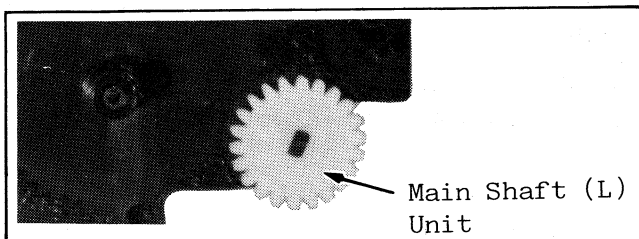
Adjustment of Cassette Up Gears-(8)
